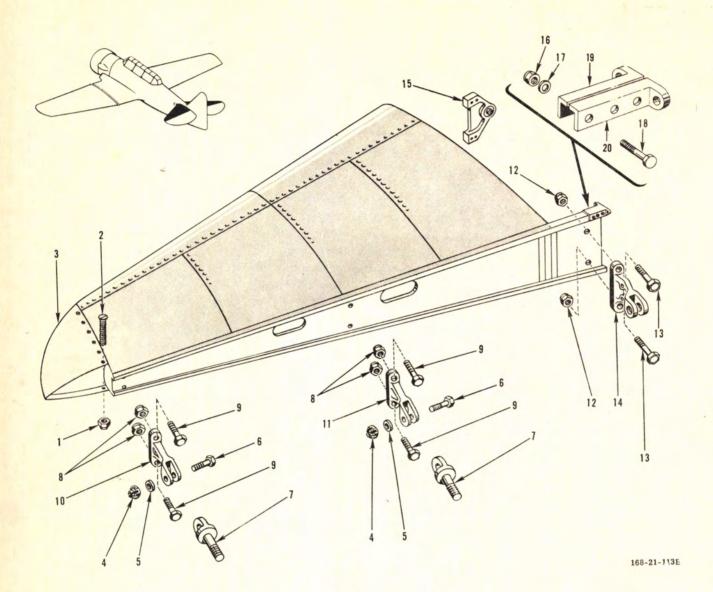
HORIZONTAL STABILIZER ASSEMBLY
